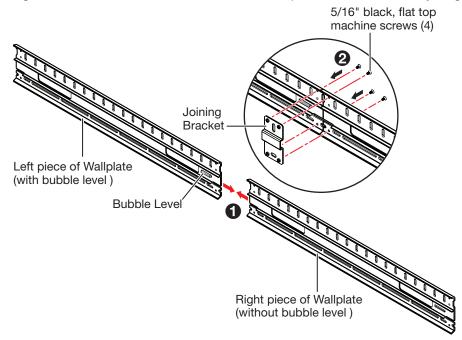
Assembling the Wallplate for the SB 33 A 82-90, and 90-100 Models
